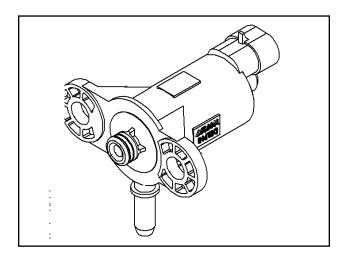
Pressure Trim Valve and Fuel Trim Valve
